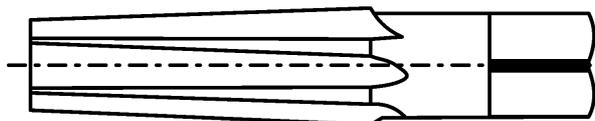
, A parallel shank socket reamer for Morse Taper.
